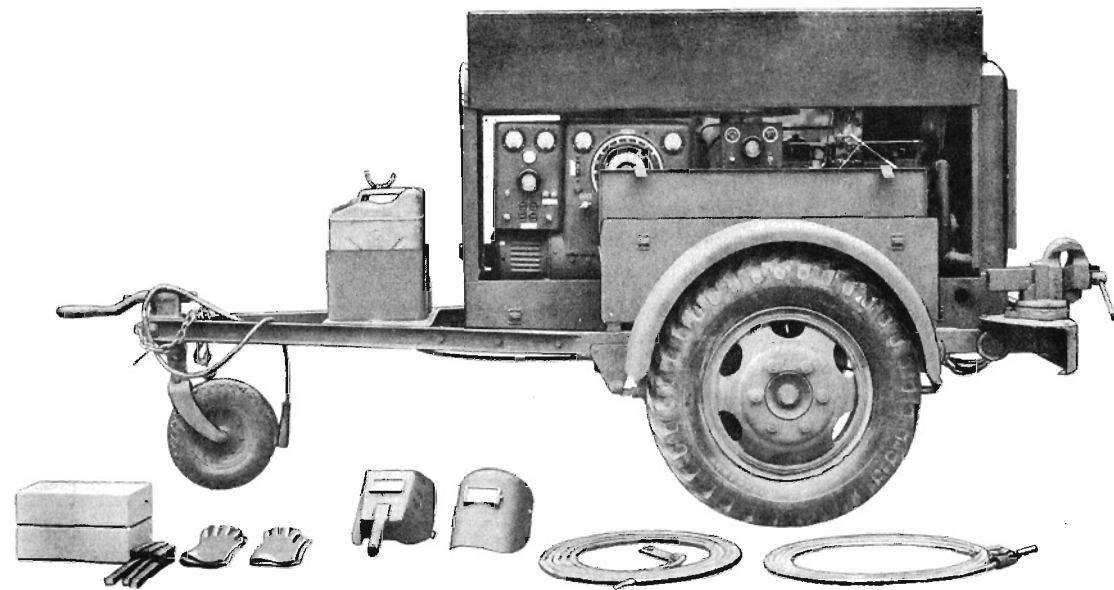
Electric arc-welding equipment, set No. 1, 300-ampere, trailer-mounted.
